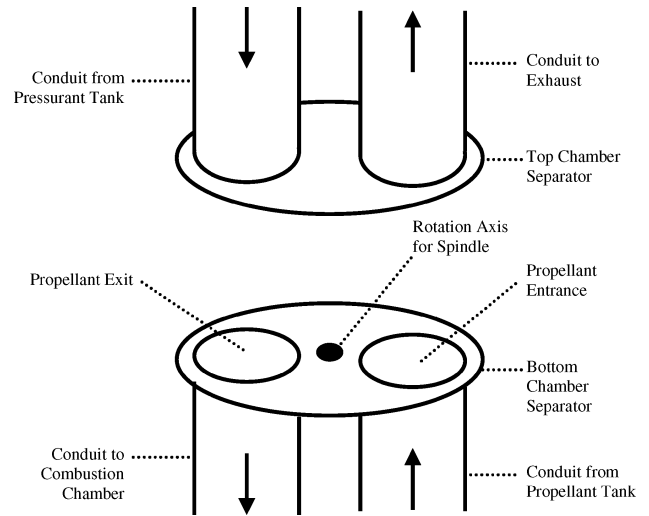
Perspective view of the pressurizer without the rotatable spindle.
